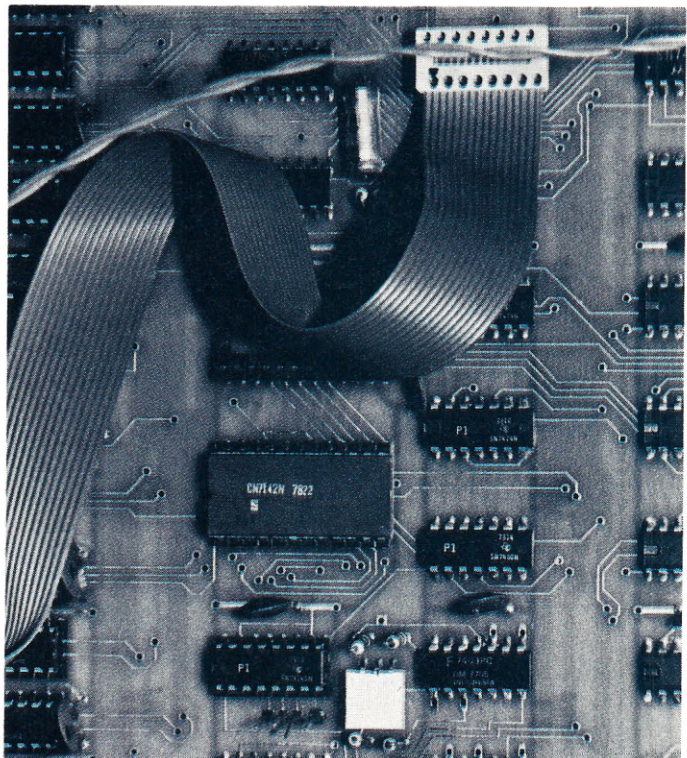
OSI 540 video board. Solder pads can be seen at pins 8 and 10 of 7403 IC.
